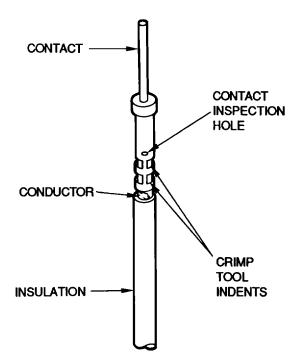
M22520/1-01 Setup, Adjustment, and Operation (Sheet 4)
